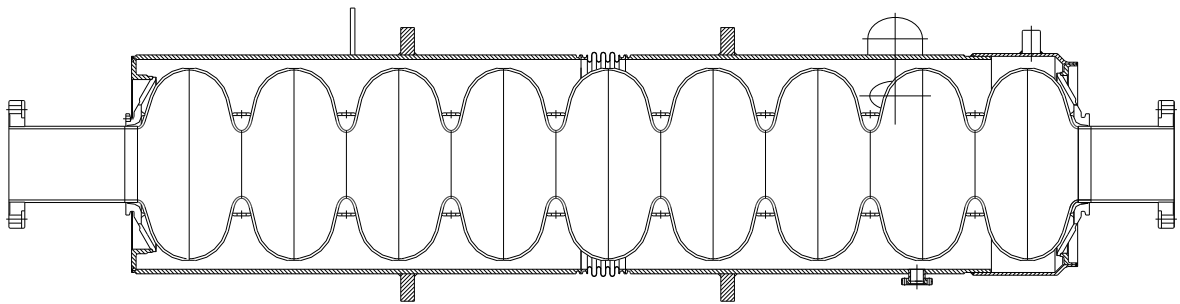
Drawing of the cross section for the cavity assembly with the modified He tank
